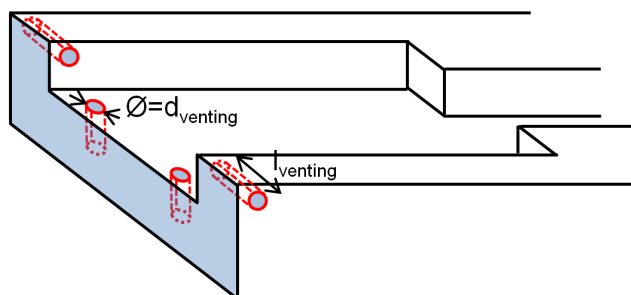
Design of venting holes for hollow waveguide device multipactor testing.
